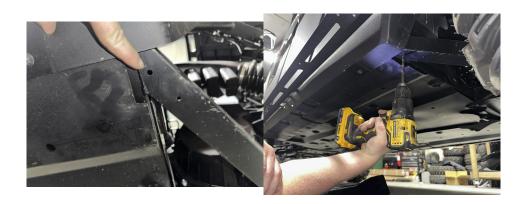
& FIG 4 - Drill hole through Rear Frame Tube
